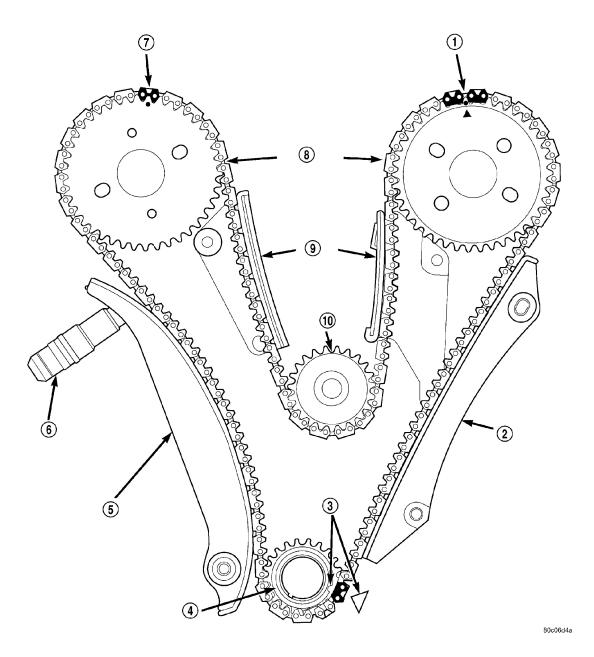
Identifyingm Primary Timing Chain Alignment Marks Courtesy of CHRYSLER LLC
